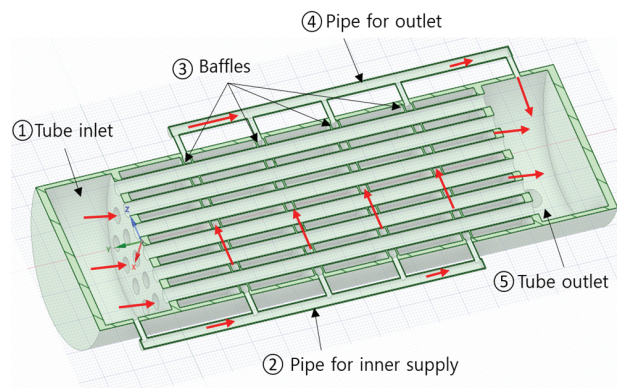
Horizontal cross section of the shell & tube exchanger with 4-baffles using inner heat flow
